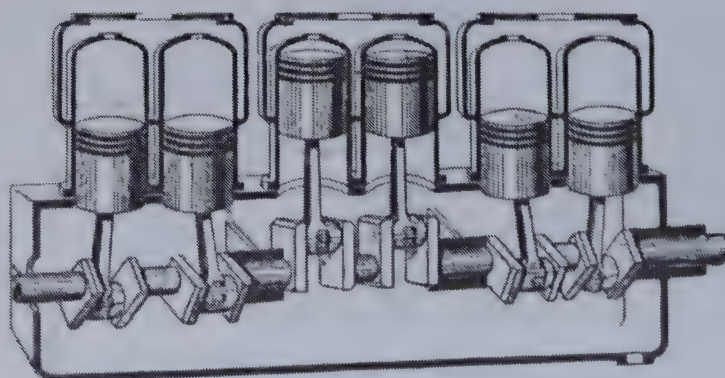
A Six Cylinder Engine consists of two Engines, each of three cylinders, coupled together. The center cranks and each consecutive pair being in the same plane. The cranks (viewed from each end) are set 120 degrees relative to each other, except the third and fourth.
